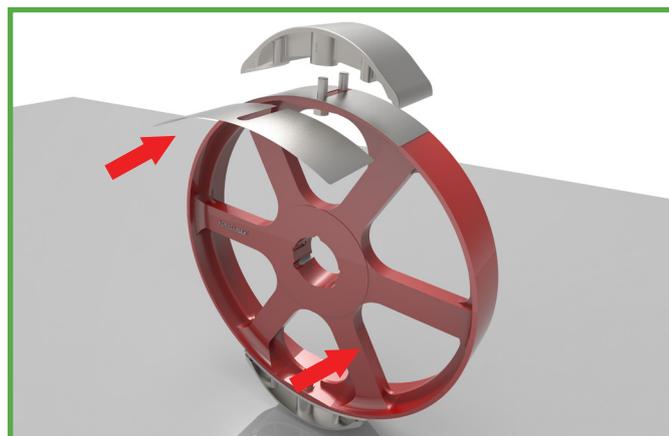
Mounting Rotor Shims on the Rotor (Step 1)
